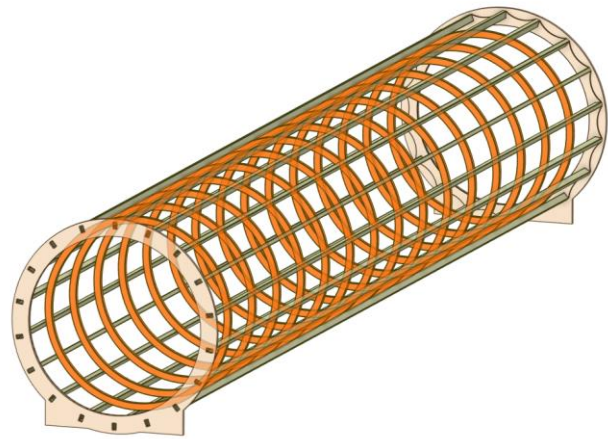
Location of the rings within the Assembly. Spacing between the rings is 1m, while spacing between the ring and flange is 0.5m
